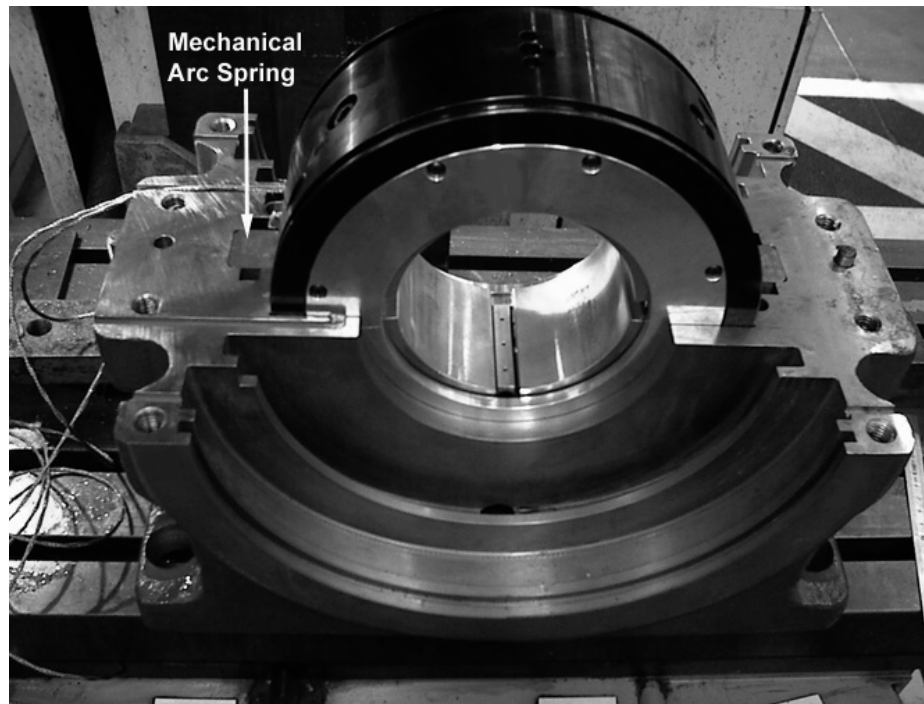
Mechanical Arc Spring Supported Squeeze Damper
